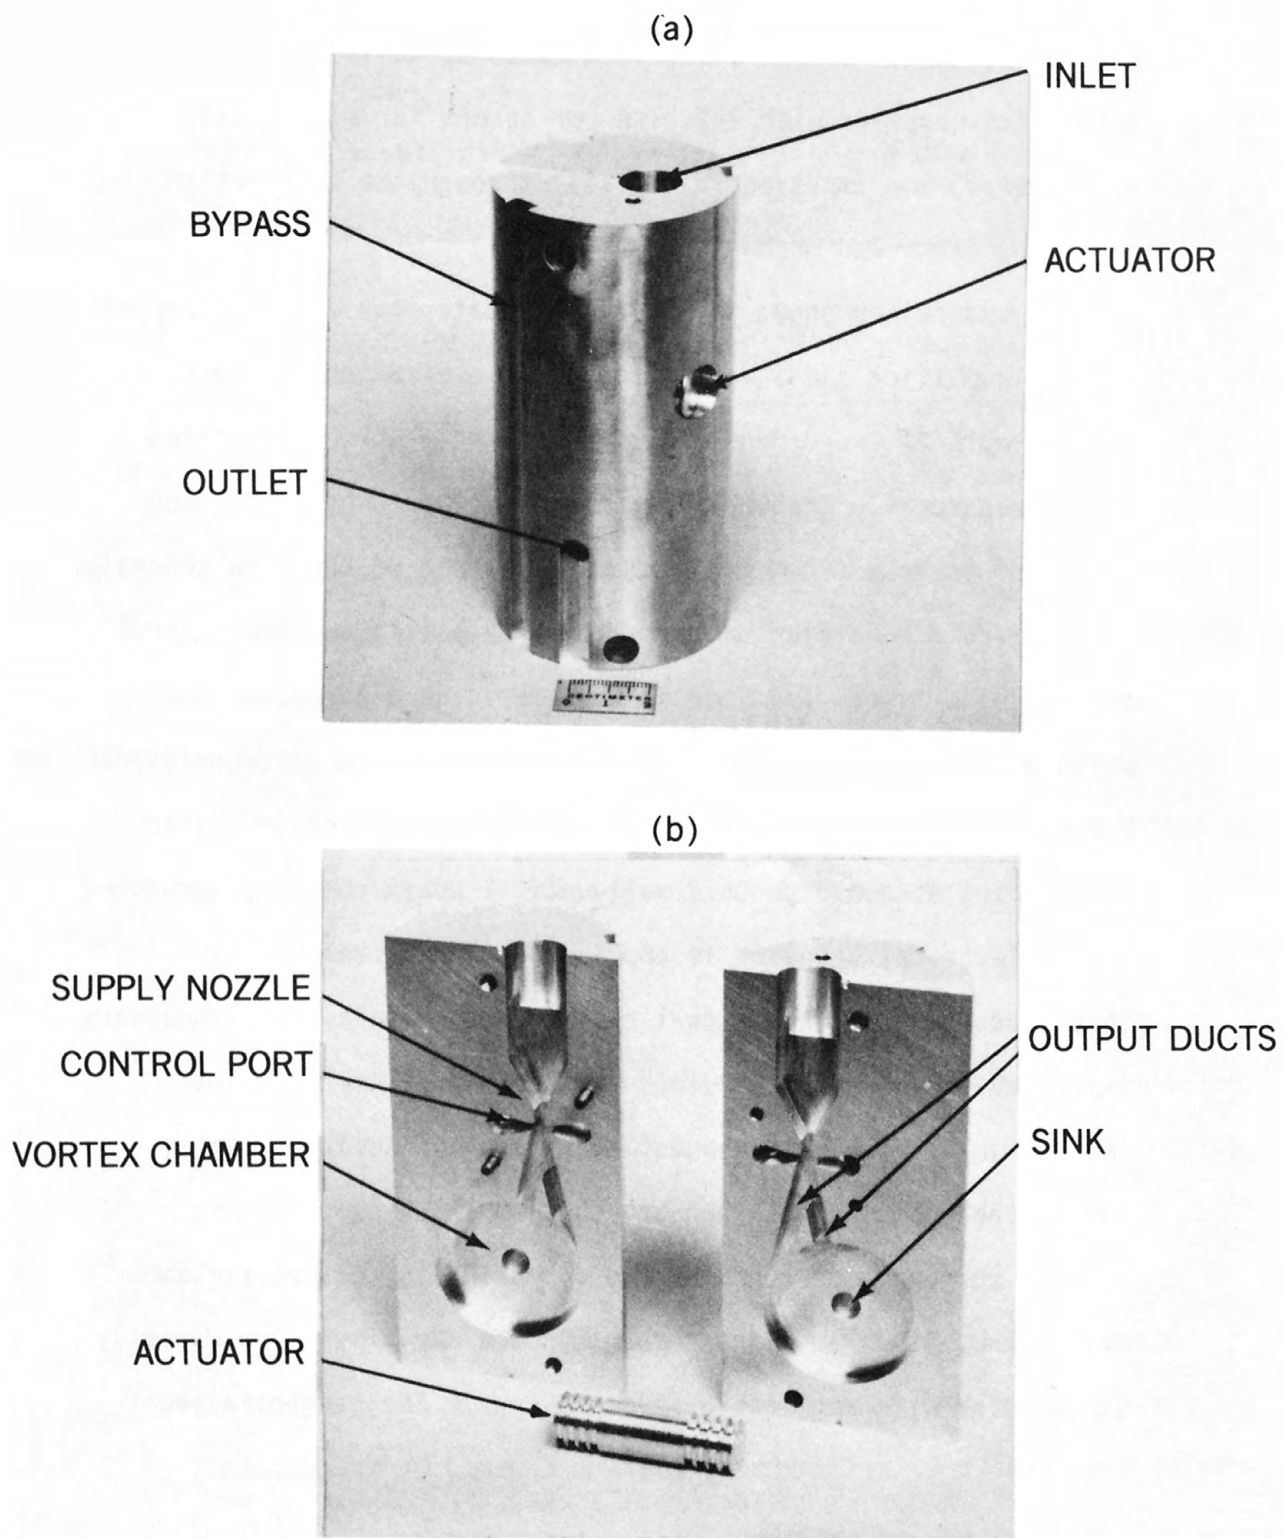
FLUIDIC MUD PULSER ASSEMBLY SHOWING (a) ASSEMBLED UNIT AND (b) PARTS AND FLOW CHANNEL GEOMETRY.
